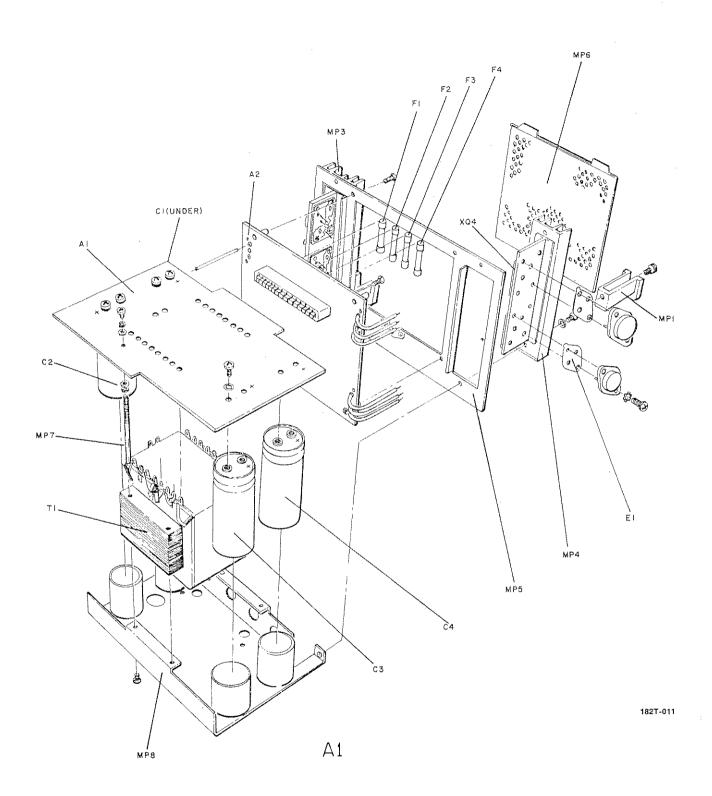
Low Voltage Power Module Exploded View 6-3
